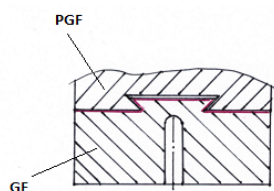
GF-PGF assembly, dovetail profile clamping [34]
